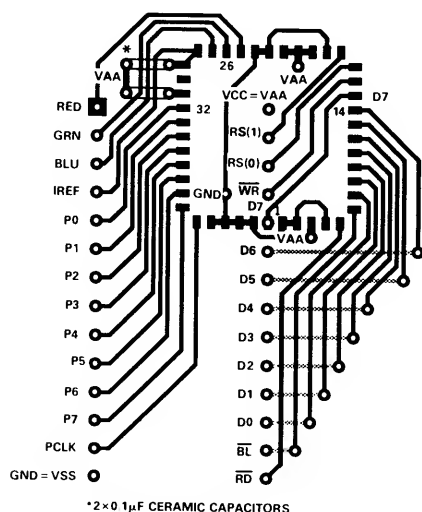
X-Ray View of Layout Using Surface Mounted PLCC
